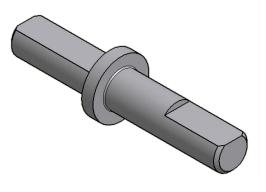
DRIVE SHAFT 3D MODEL
